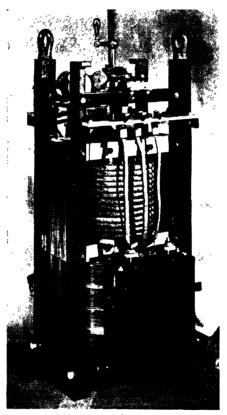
An A.C. arc welding transformer unit. Reactor above while the primary and secondary windings are in the lower part. The handwheel raises or lowers the core of the reactor winding
